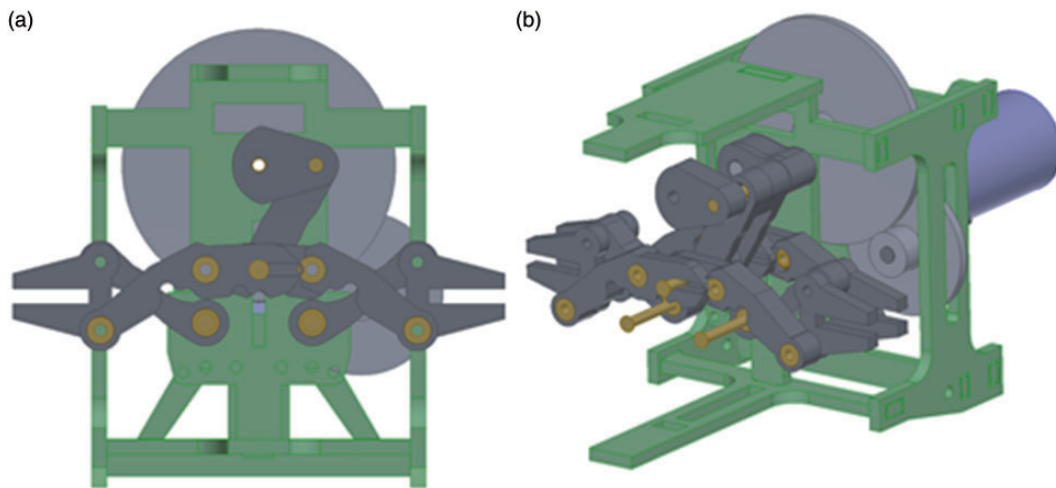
Three-dimensional CAD drawings of the flapping mechanism. (a) Front view and (b) isometric view.
